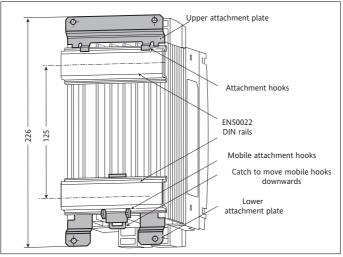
Attaching the 7100A power thyristor unit to DIN rails (80A and 100A, rear view).
